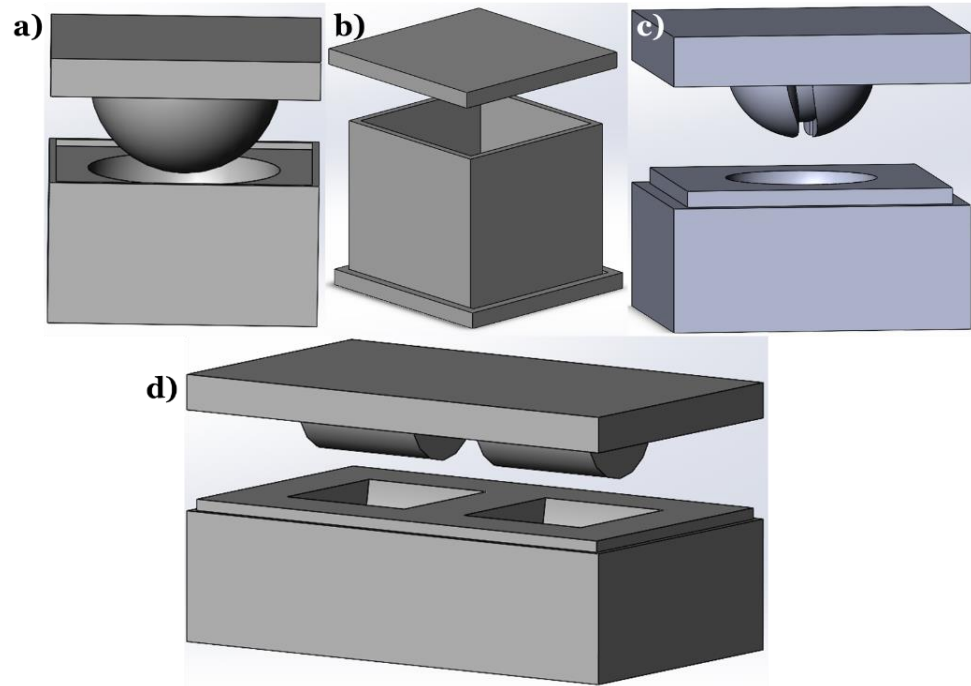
3D designs of soft gel gripper: a) Hemi-spherical shell structure mould; b) Cube shell structure mould; c) Flat finger structure mould; d) Hemi-cylinder shell structure mould.
